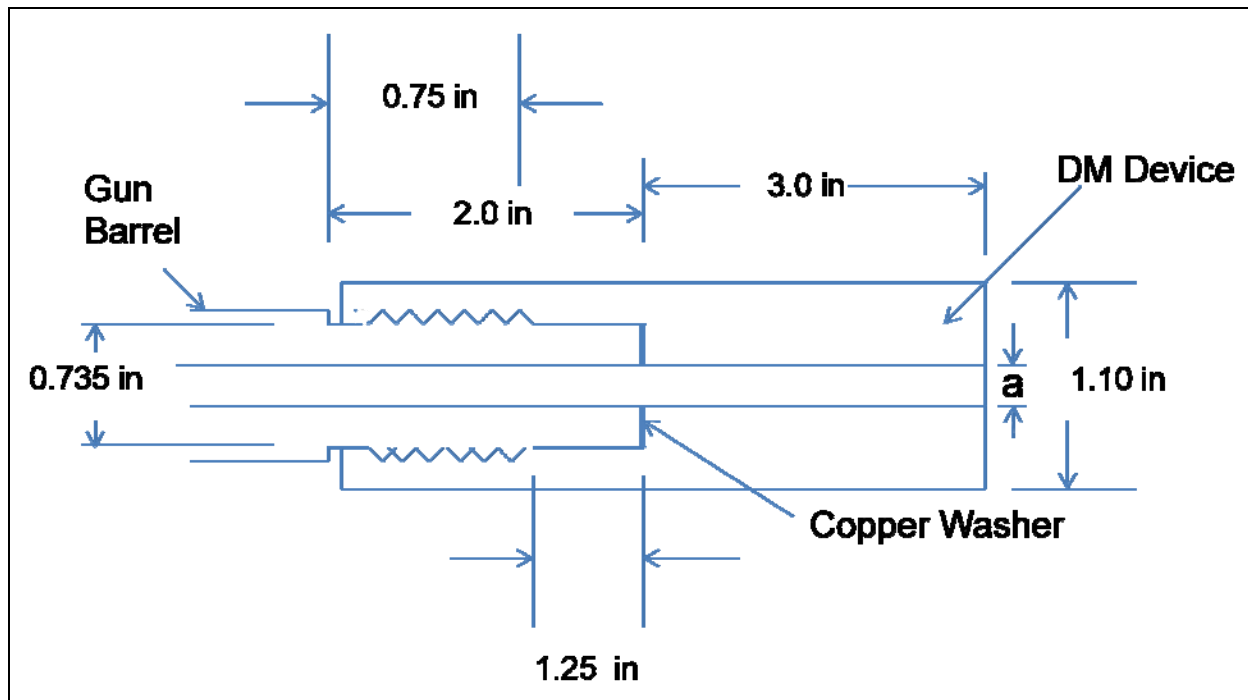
Cross-sectional schematic drawing of DM device with dimensions.
